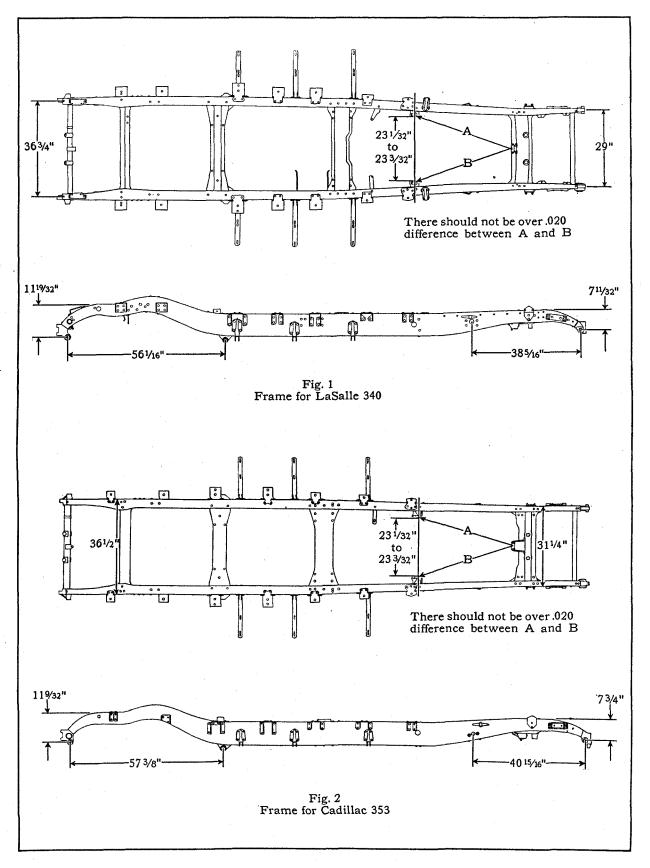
Frame Diagrams Cadillac 353—La Salle 340
